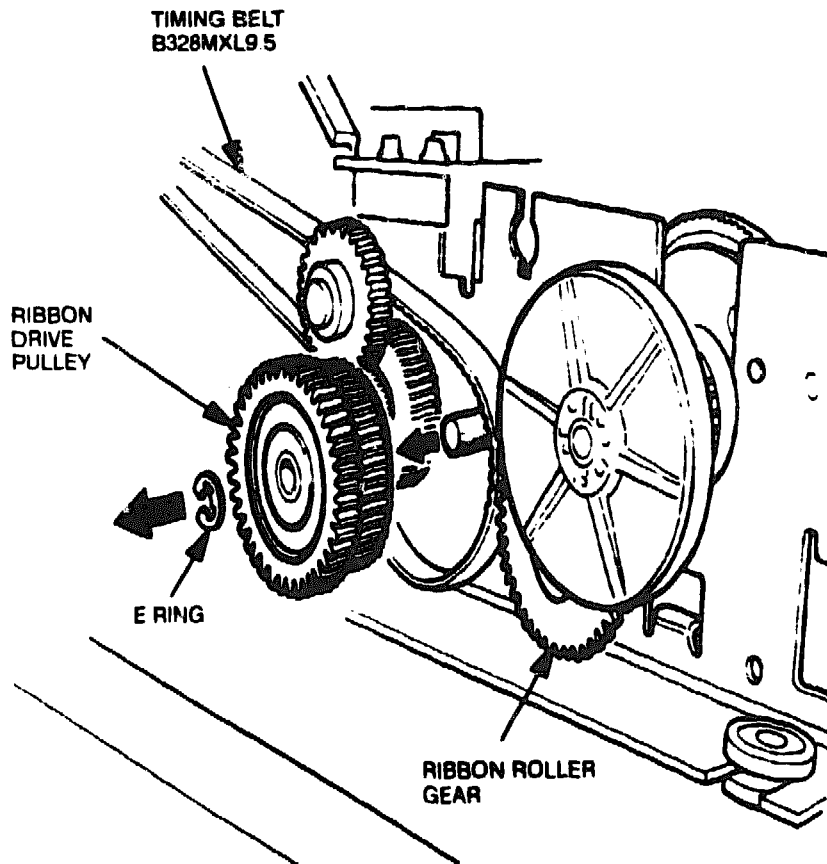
Ribbon Drive Pulley, Ribbon Roller Gear, and Timing Belt B328MXL9.5
